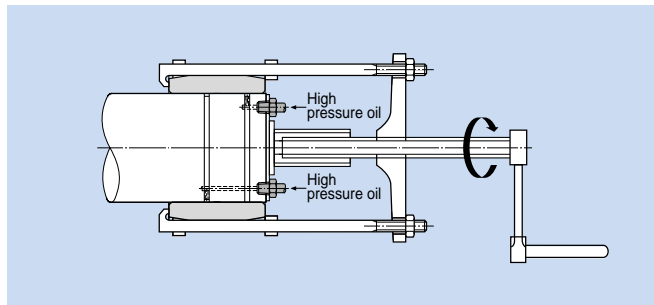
Disassembly using high pressure oil (hydraulic)
